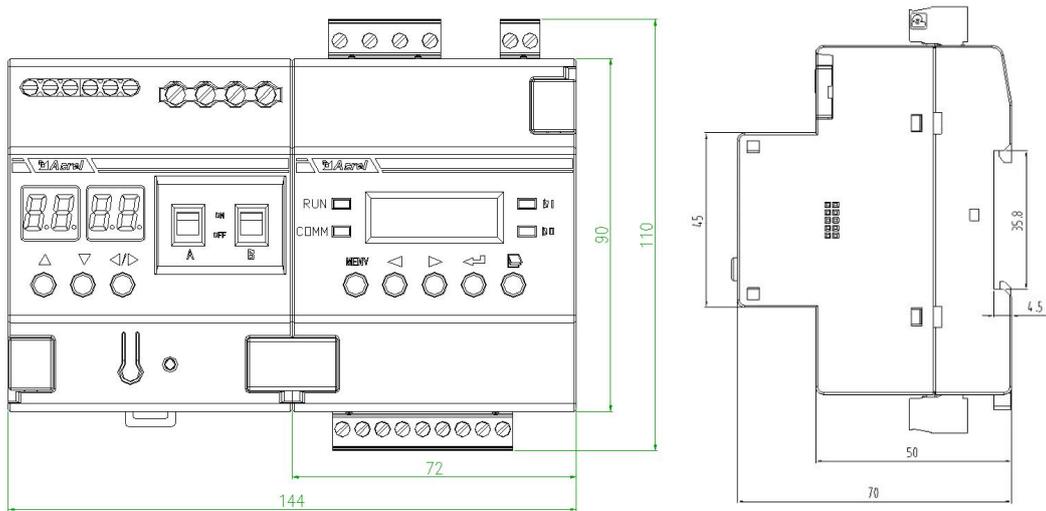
ASL220Z-SDx/16 profile and mounting dimensions
